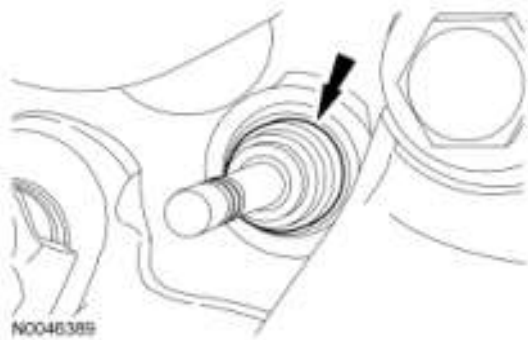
Positioning New Valve Seal Onto Valve Stem
